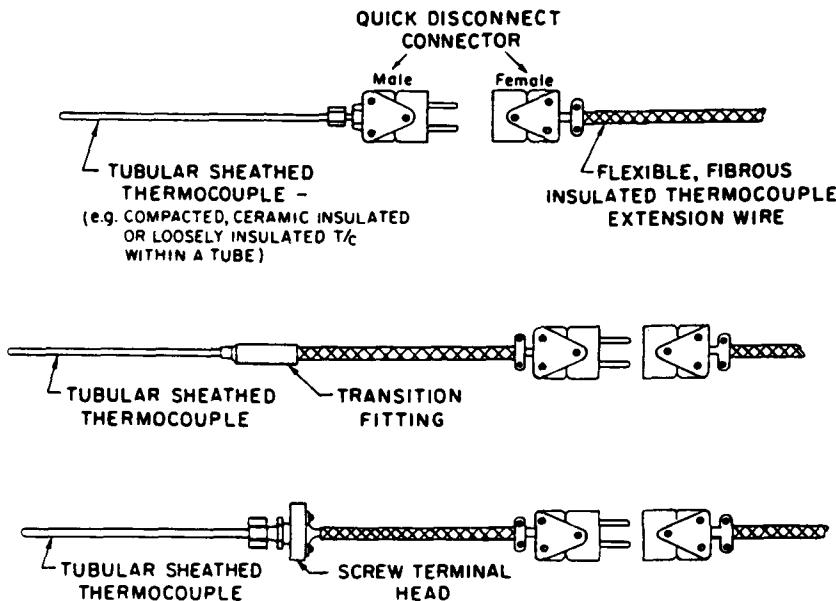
Typical examples of thermocouple assemblies with protecting tubes.
